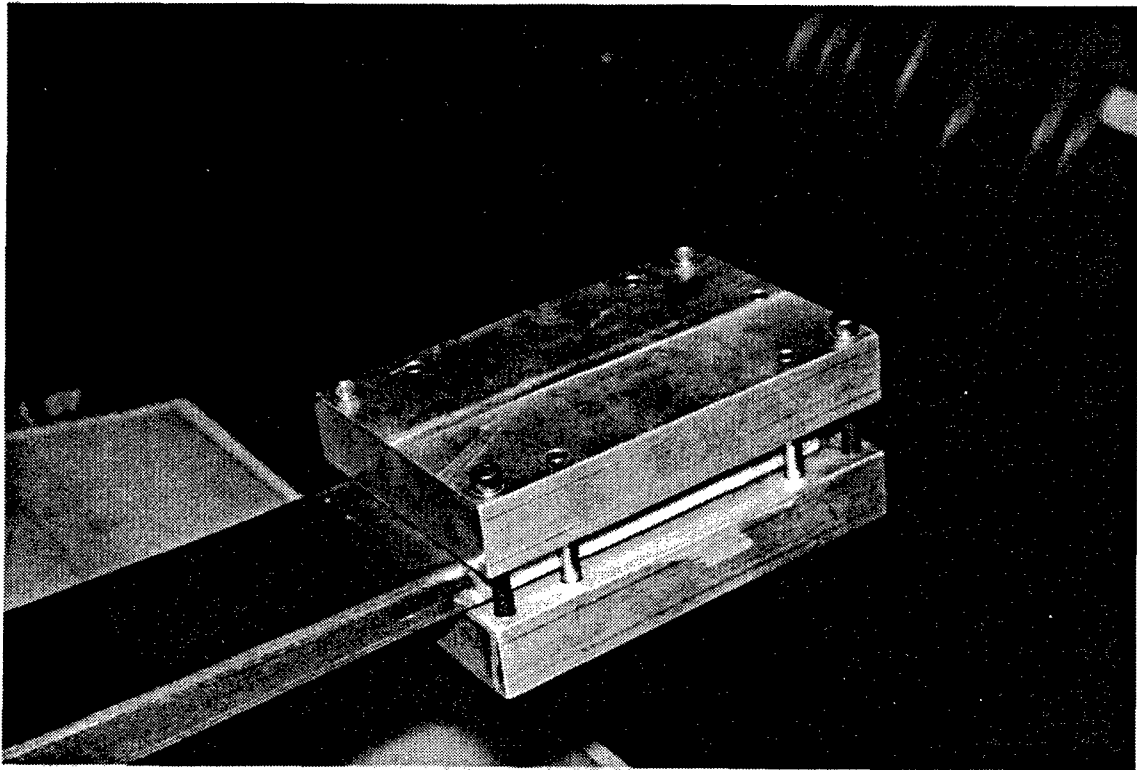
Fixture for Positioning and Bonding of Wear Pad
